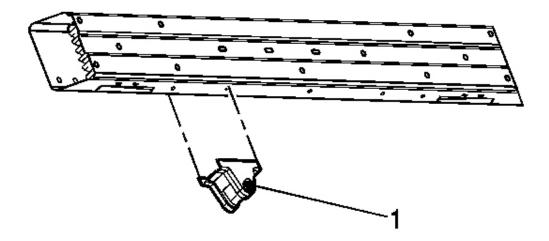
View Of Tow Hook - Front Courtesy of GENERAL MOTORS CORP.
